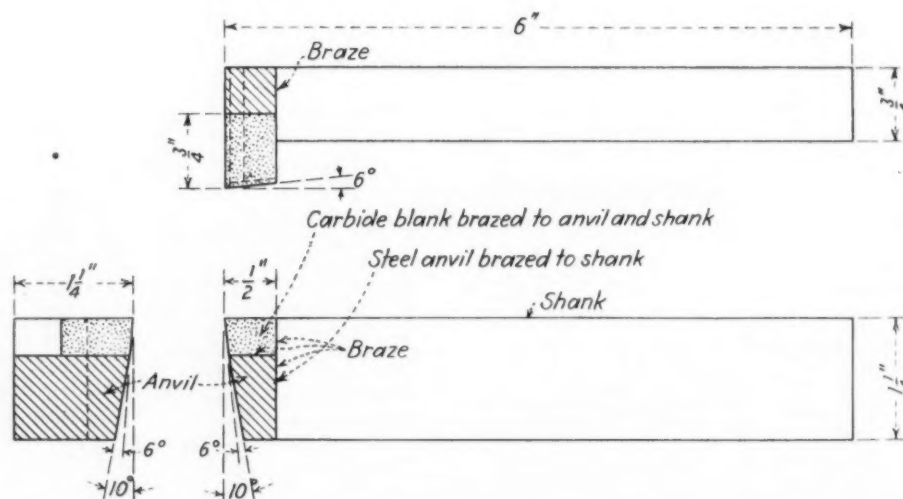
Greater offset of the cutting edge is permitted by this construction, which is somewhat more economical than the modified form of facing tool shown in Fig. 5.
